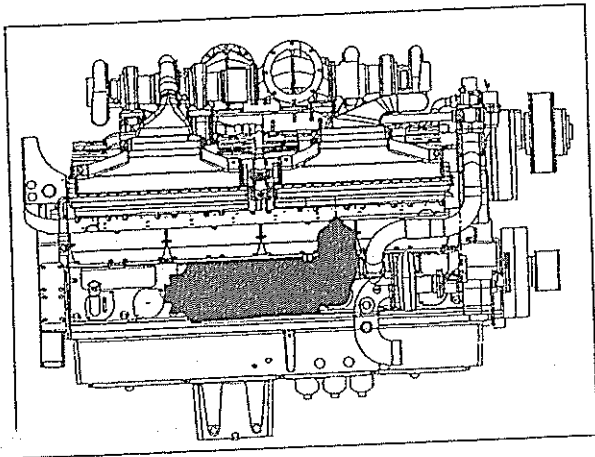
Eliminator installed on a Cummins QSKV60 Engine - Side View.
